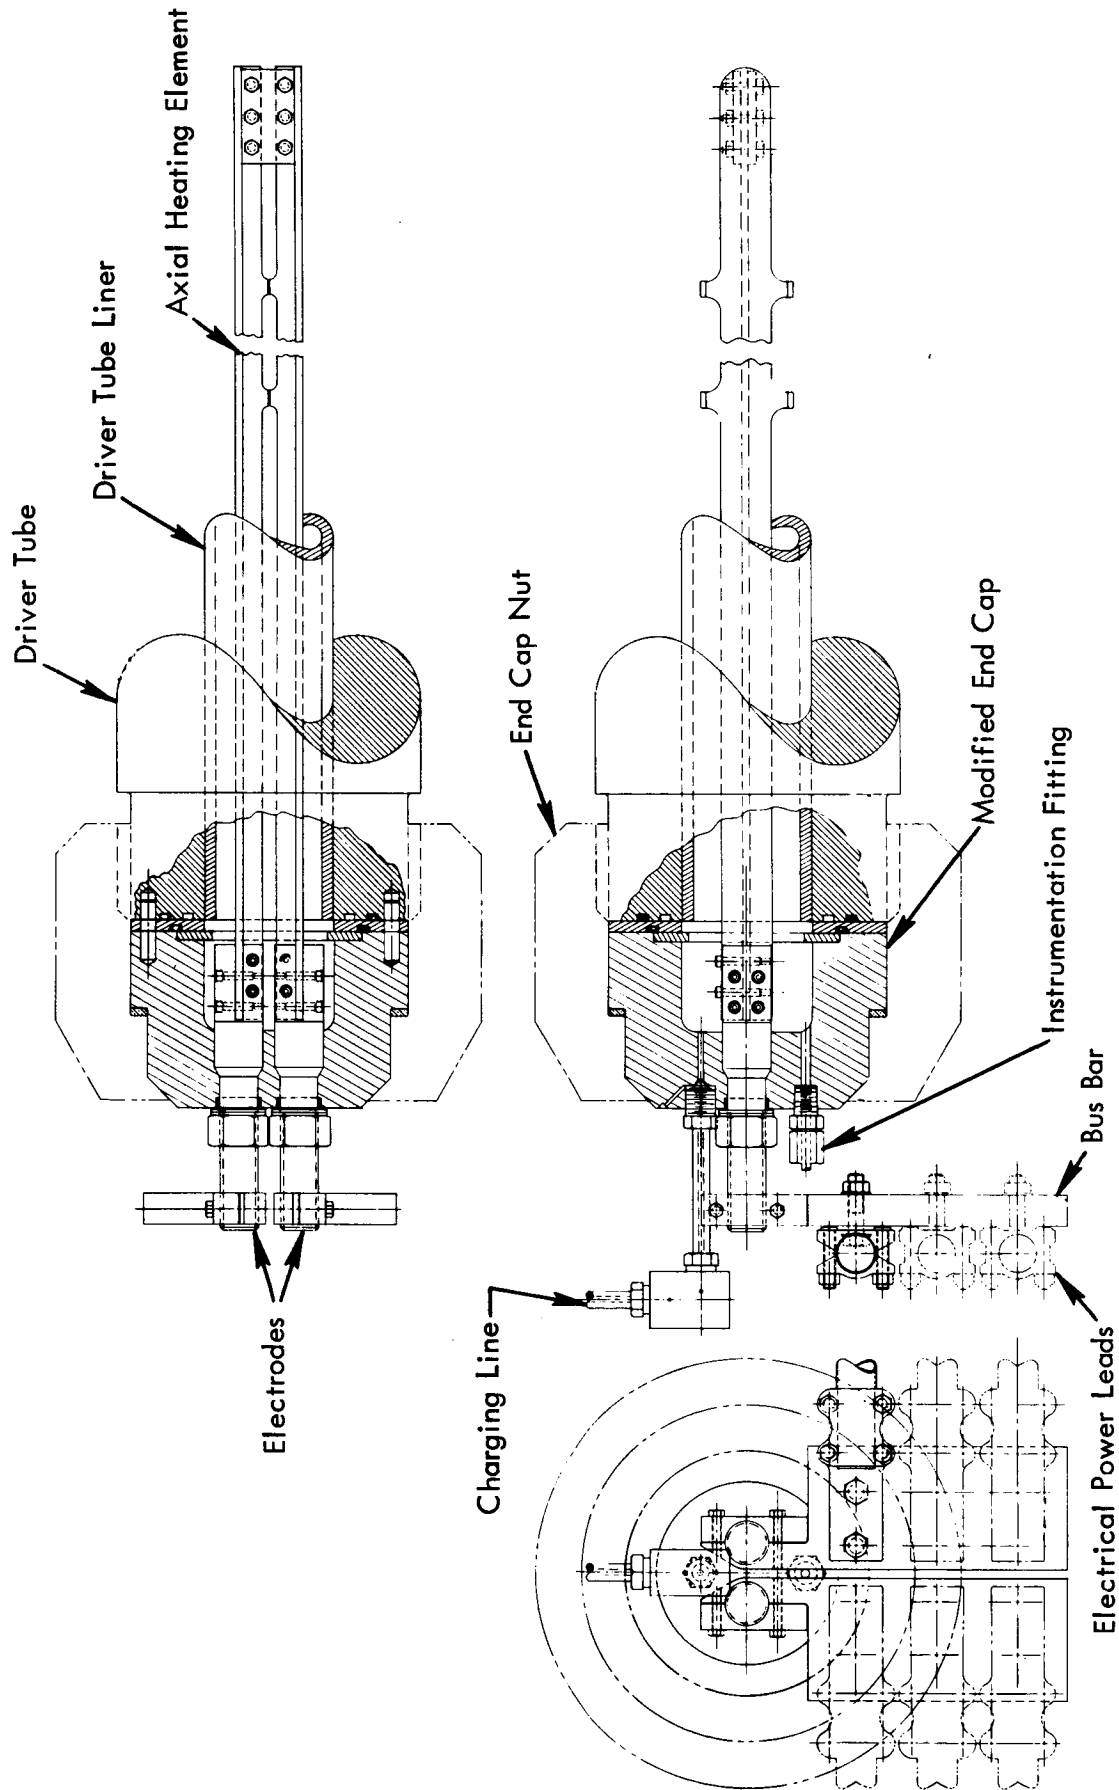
Driver Section End Cap Assembly with Axial Heating Element
